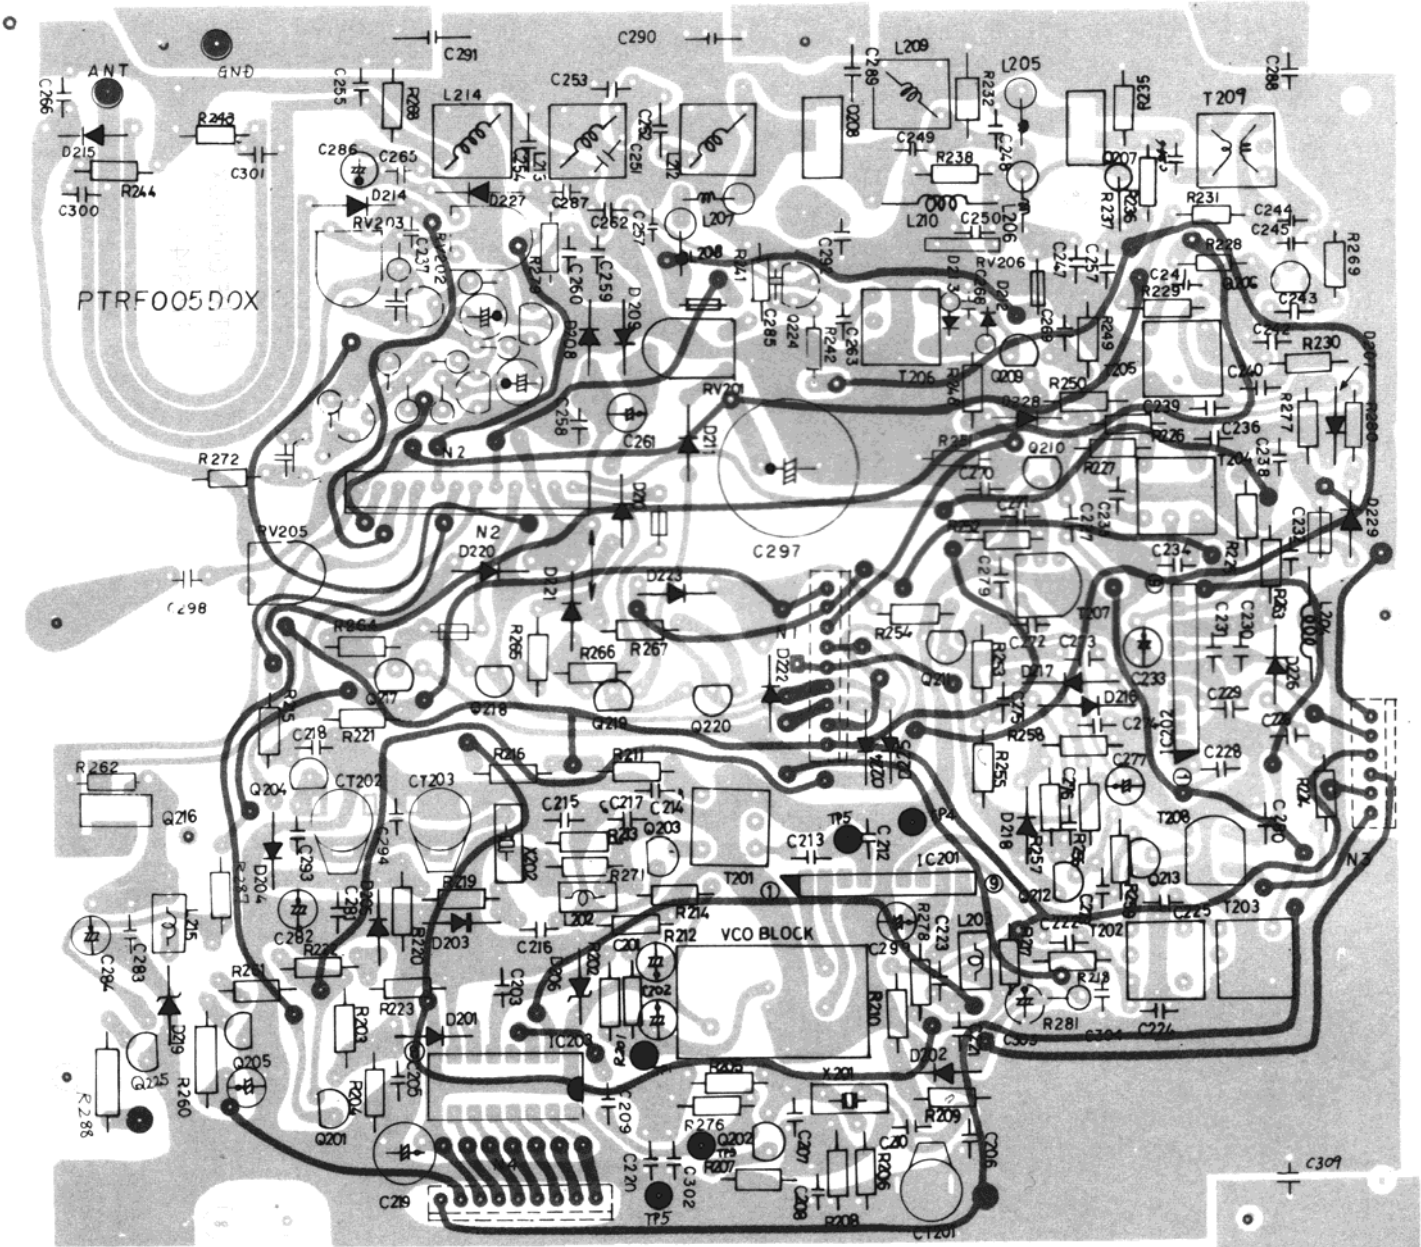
COMPONENT LAYOUT (PC Board)
